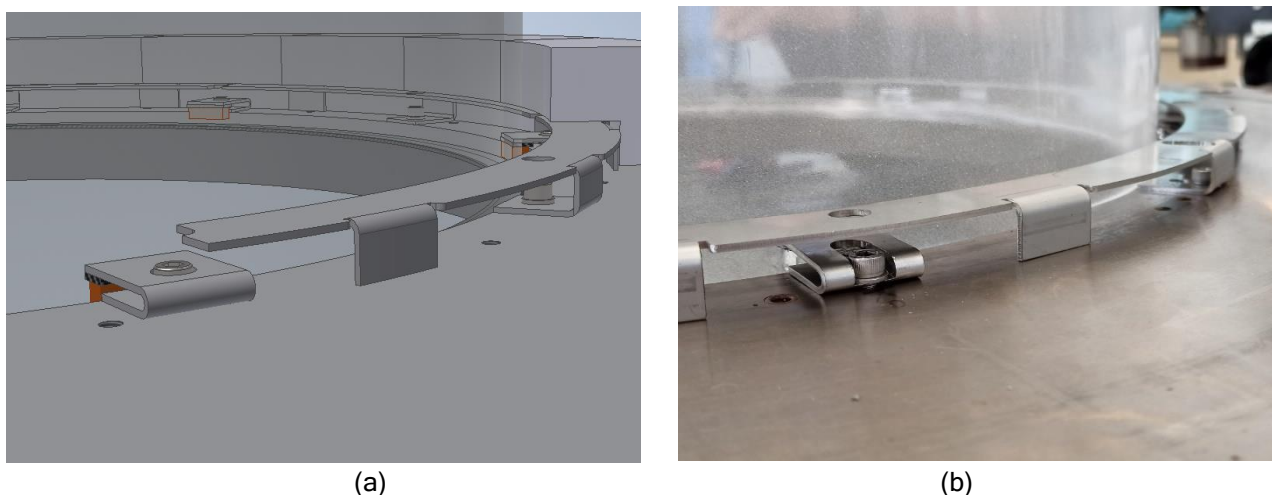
Window fixing with clamp sheets. (a) CAD drawing. (b) real hardware.
